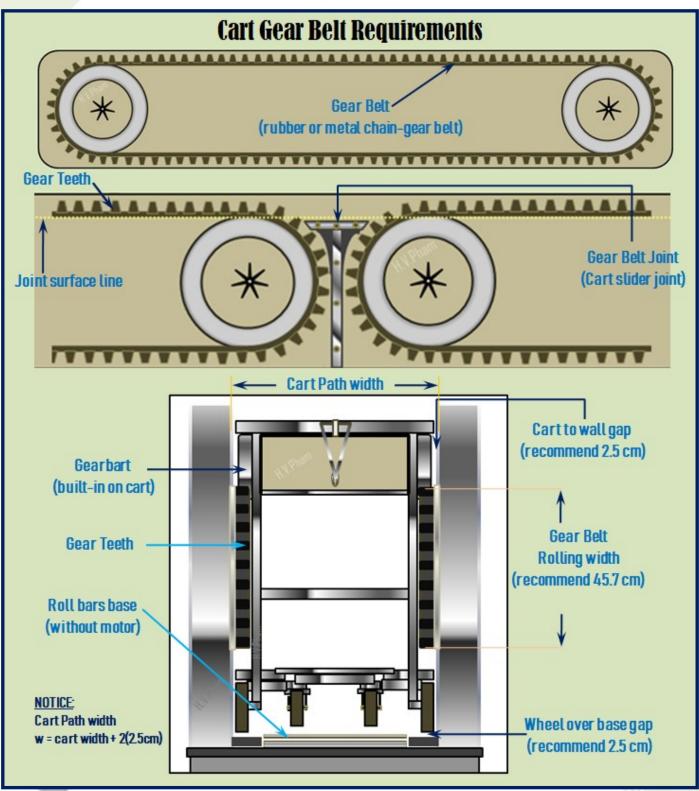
OH SMART AIRPORT -Smart Gear Belt Cart System View
